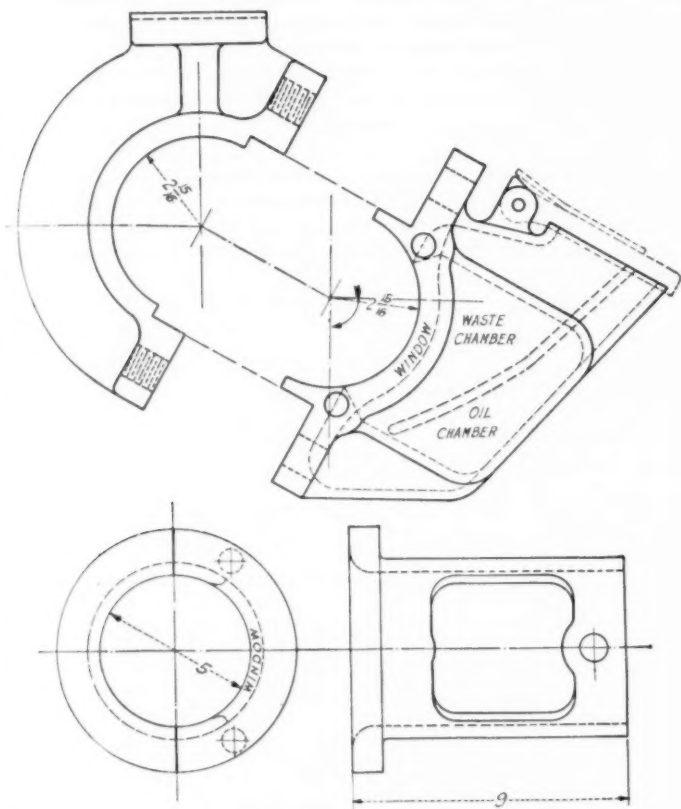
AXLE BEARING USED IN THE EXPERIMENTS
